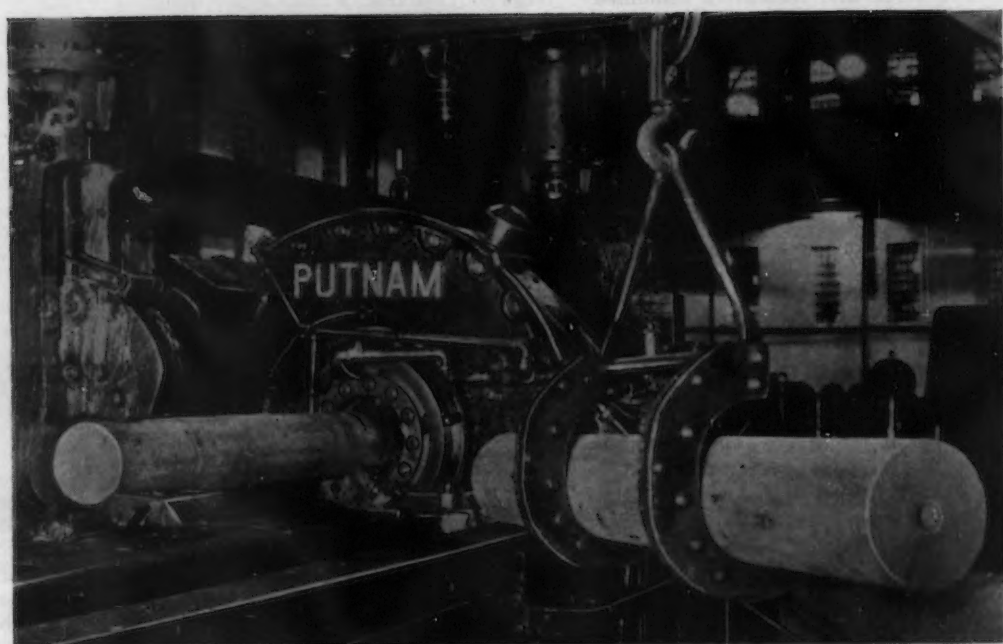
Billet is pushed through the revolving cutting tools by the entering side carriage until it is gripped by the discharge side carriage.
